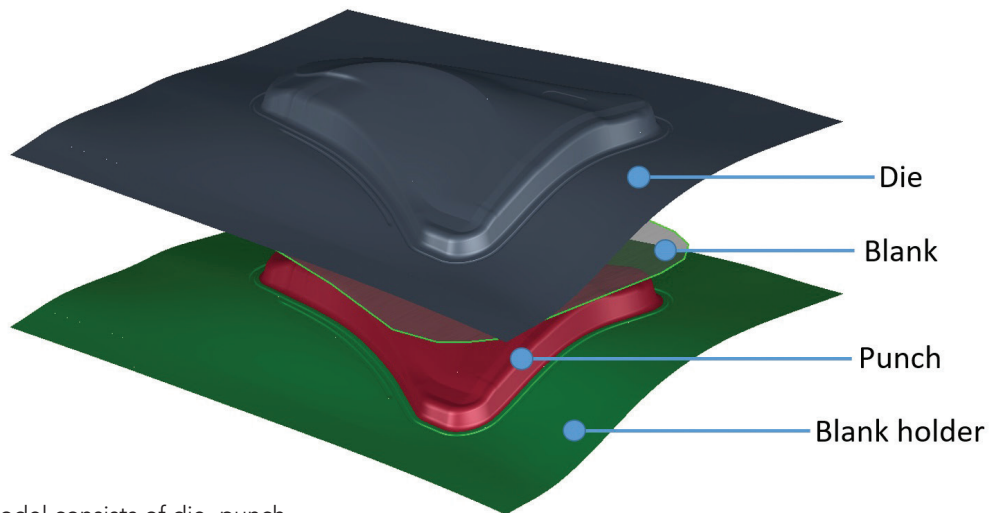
/ The fender model consists of die, punch, sheet and blank holder
